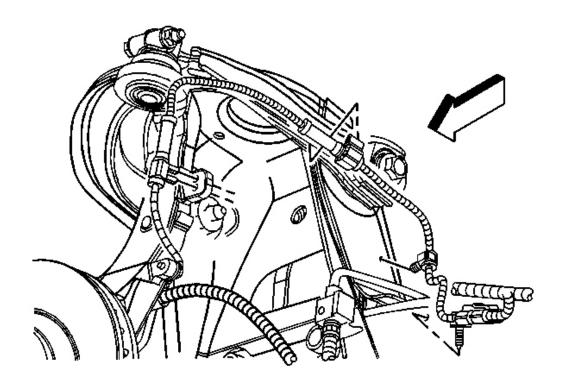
View Of ABS Harness Courtesy of GENERAL MOTORS CORP.
